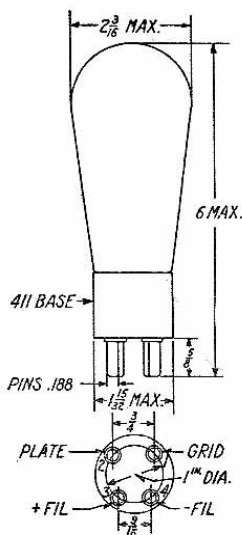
TYPE RJ-550 TUBE AND BASE DIMENSIONS
